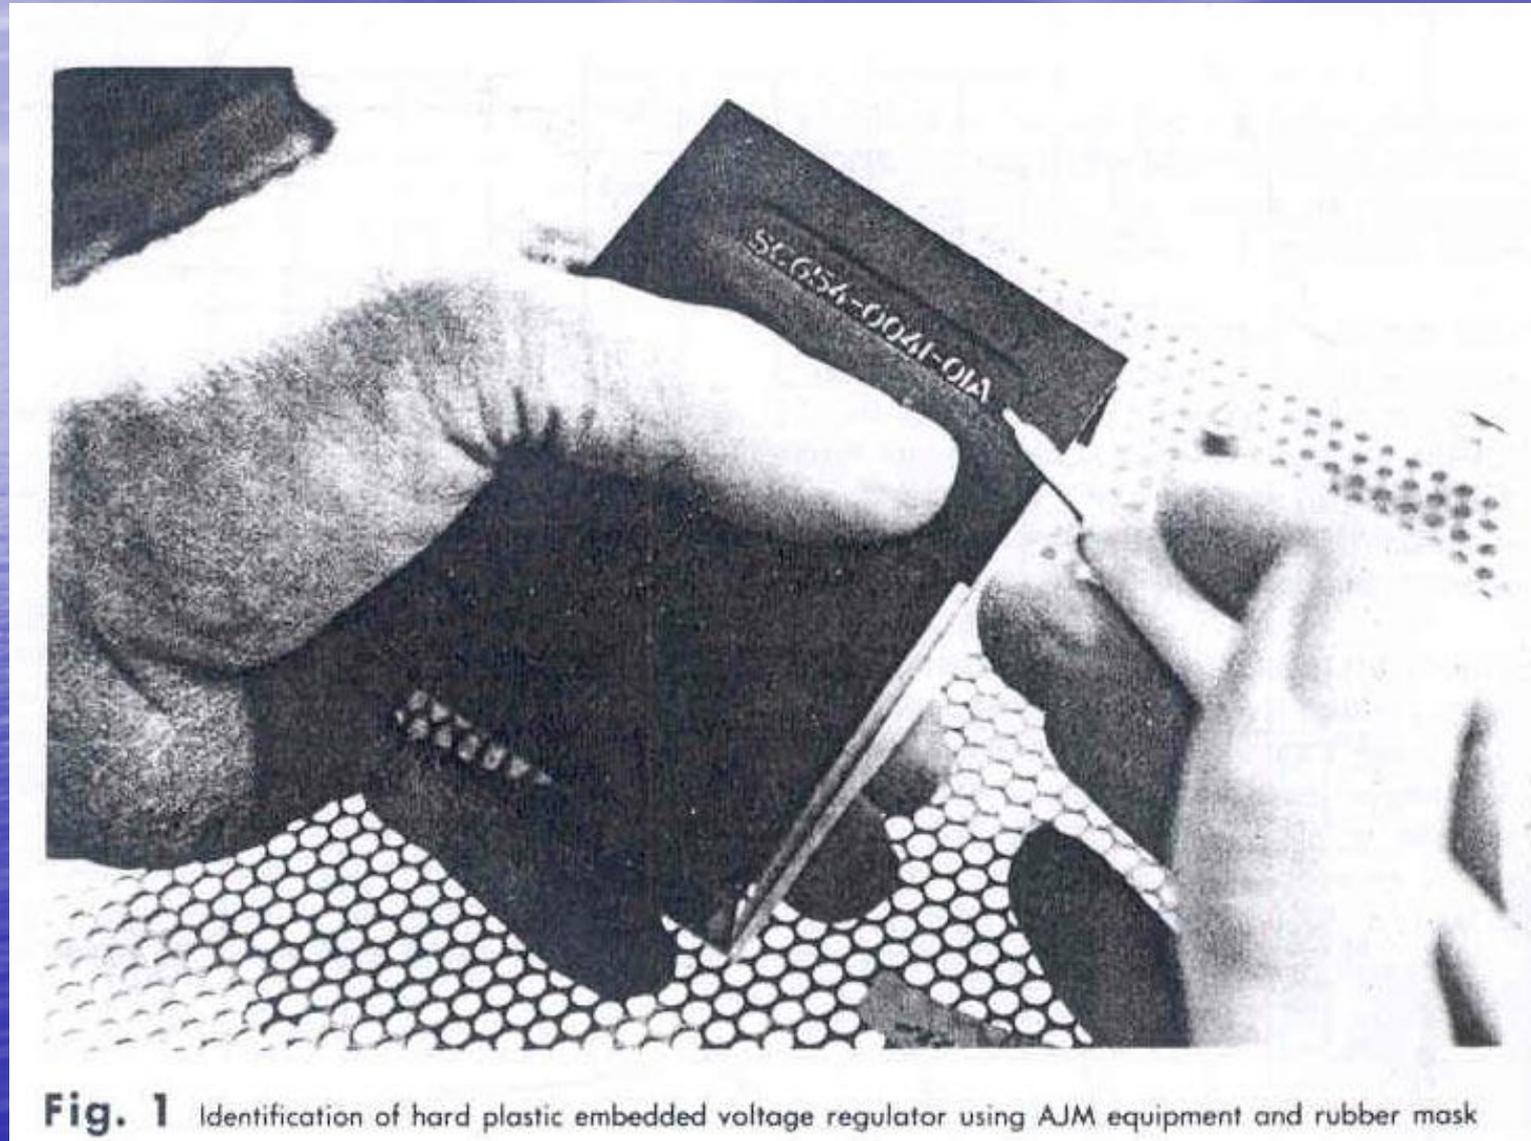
Identification of hard plastic embedded voltage regulator using AJM equipment and rubber mask
